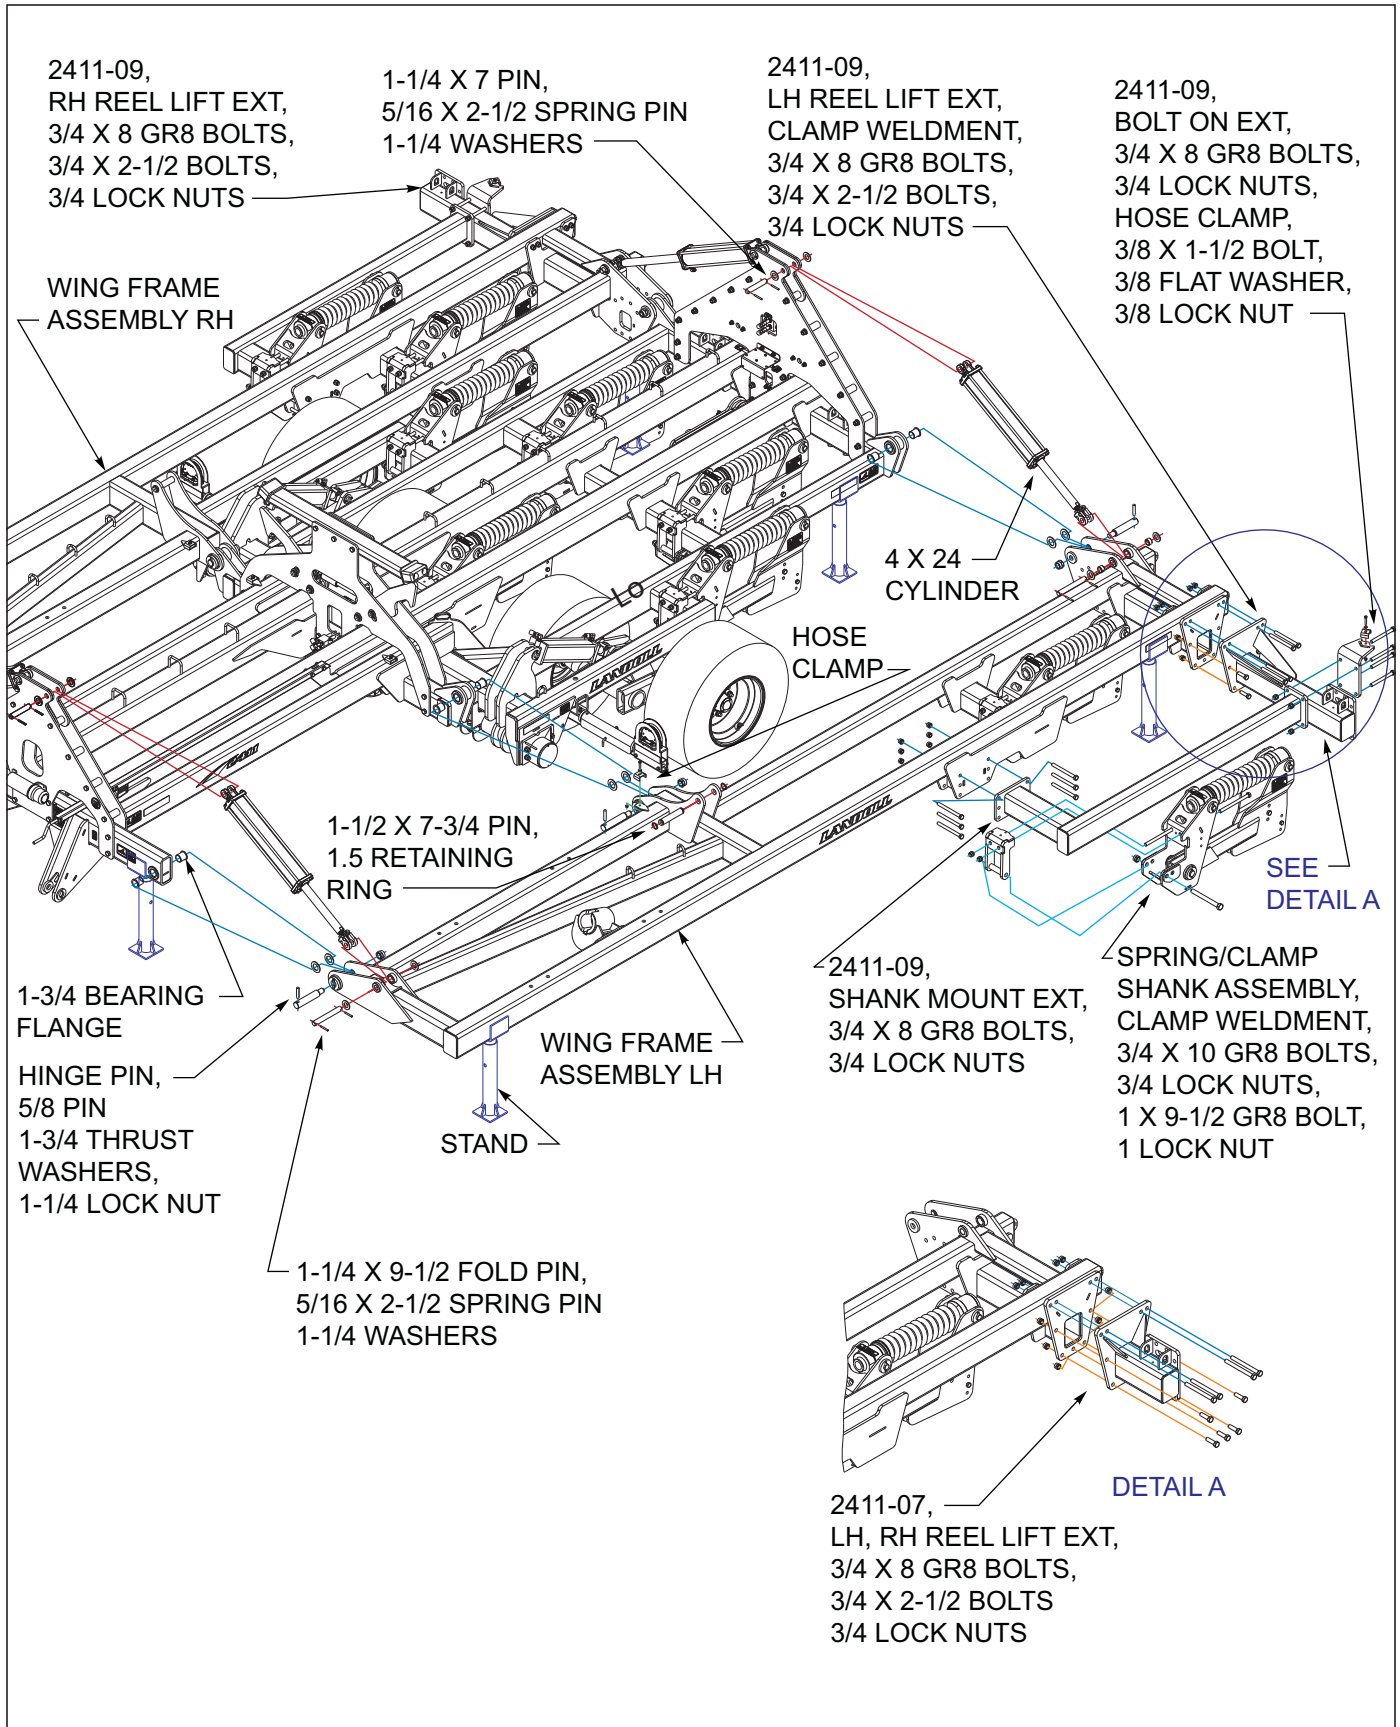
Wing Frame Assembly 2411AFG-07-09
